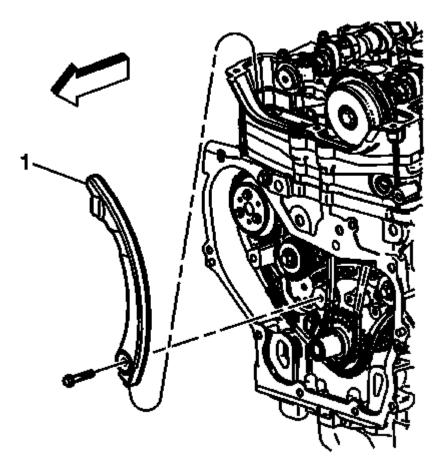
Adjustable Timing Chain Guide Bolt And Bolt Courtesy of GENERAL MOTORS COMPANY
